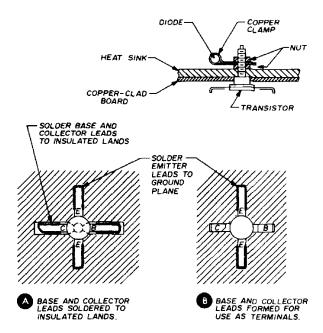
Methods of mounting stripline-opposedemitter packaged transistors. Also shown is a base-bias control diode clamped to the transistor mounting stud for thermal tracking.
